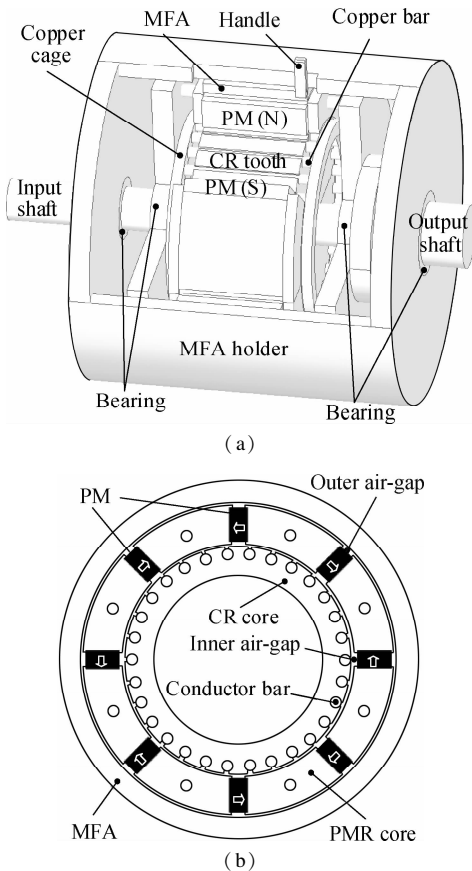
Structure of the proposed PMASD. (a) Three-dimensional view; (b) Shaft section view
